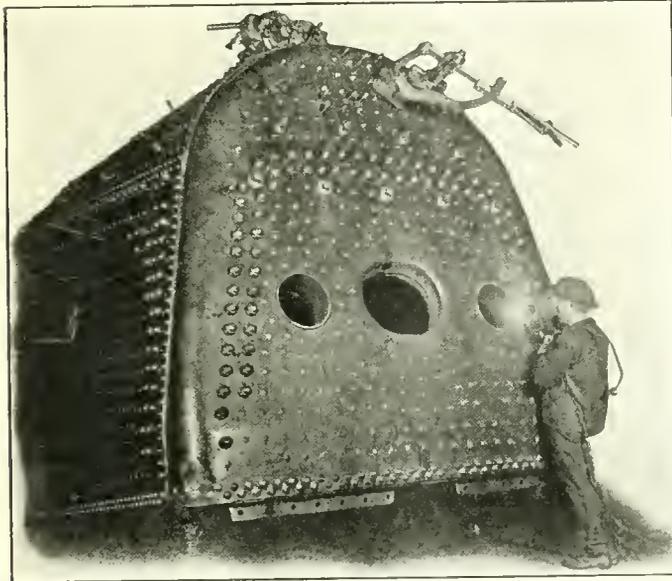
Shows Method of Electrically Welding Openings in Back Head of a Firebox
